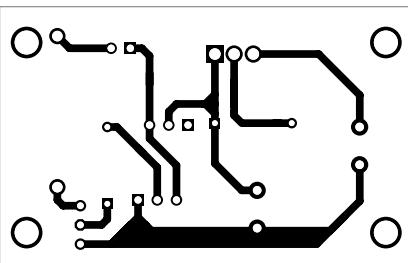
Actual-size PCB of the solar light for a portable toilet
